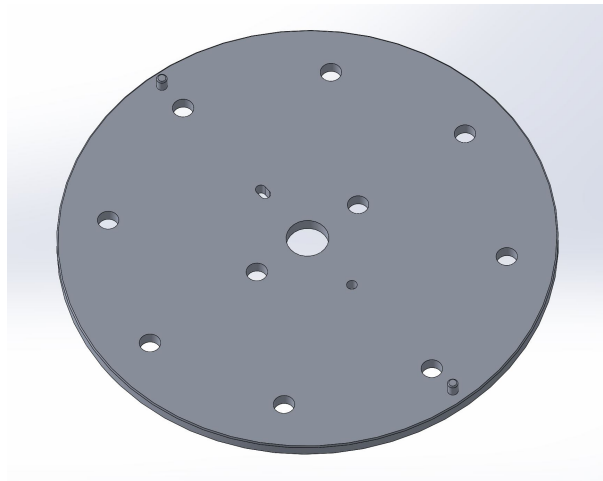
Rotor fixture concept 3, P-C3-3.0.3
